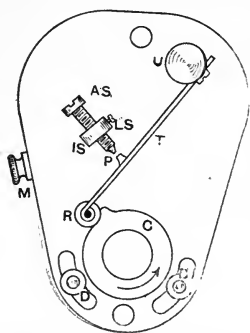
MAKE-AND-BREAK CONTACT BREAKER, POSITIVE TYPE.
